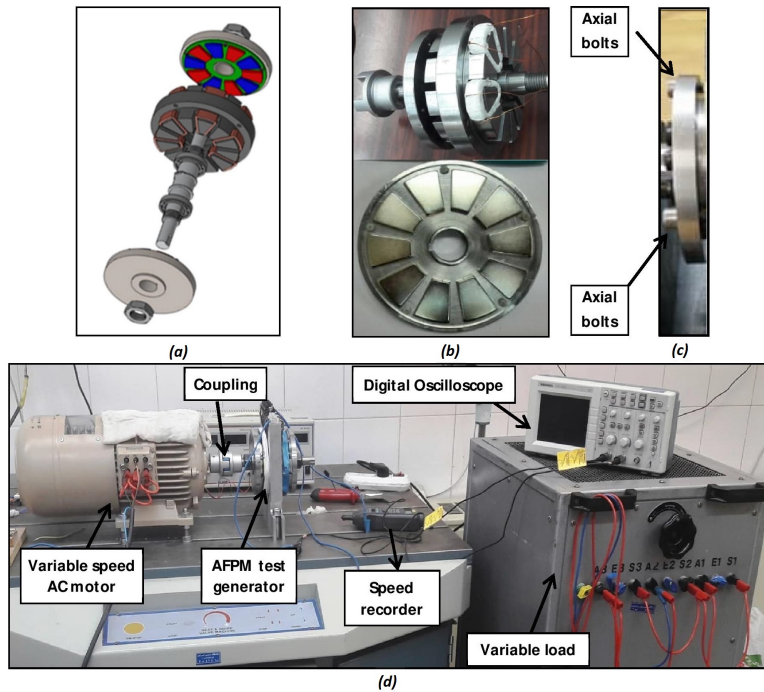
(a) Exploded view drawing of axial flux permanent magnet test generator, (b) stator core with two installed coils and rotor disk with PM pieces, (c) declined rotor implemented by axial bolts, (d) practical setup for experimental data sampling.
